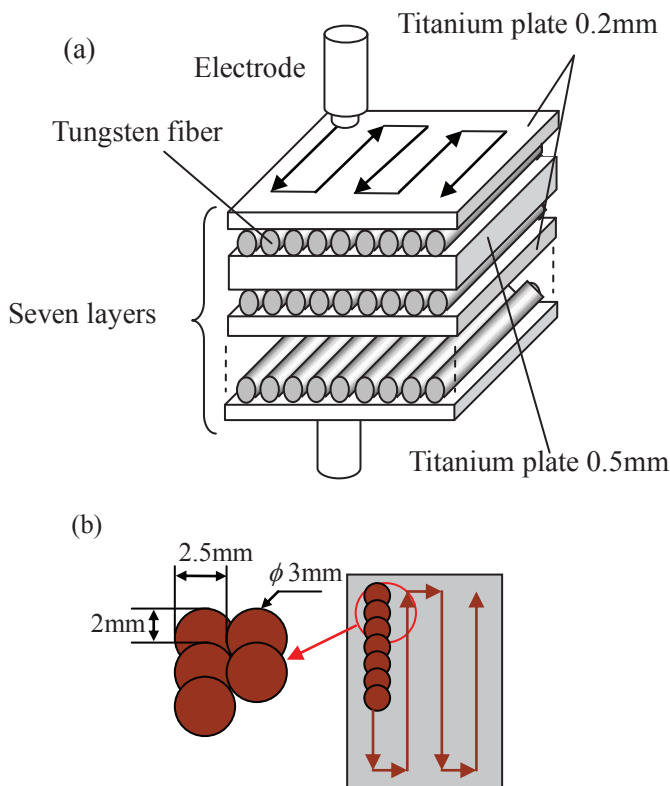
Schematic diagram of: (a) the manufacturing procedure by the spot welding method, (b) the spot welding positions which define the coverage for W/Ti composite.
